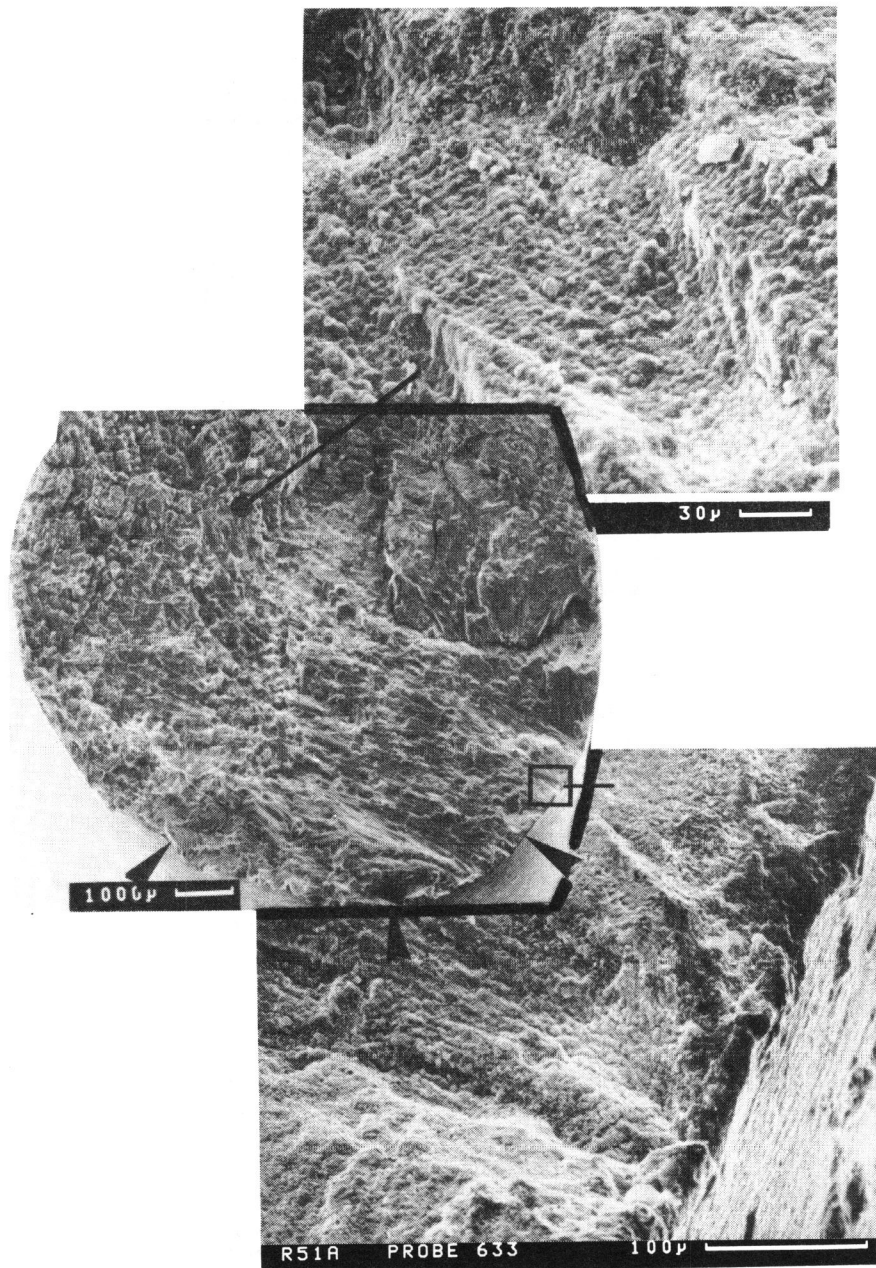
IN 713 LC, LCF fracture surface with shell shaped initial cracks, 20 % HCF-predamage, several crack origins
